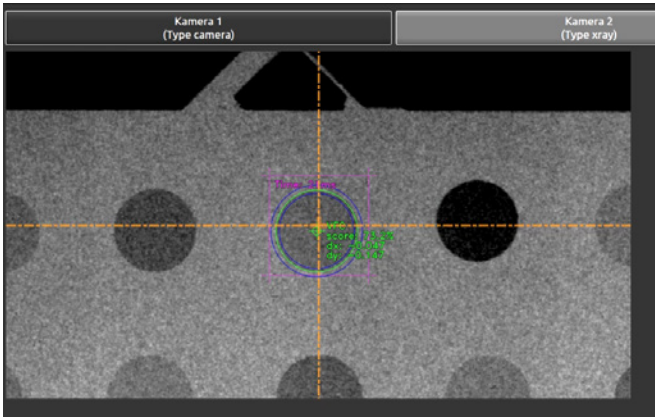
Layer-to-layer fiducials on a 74-layer PCB with a 10 mm thickness recognized by X-ray.
